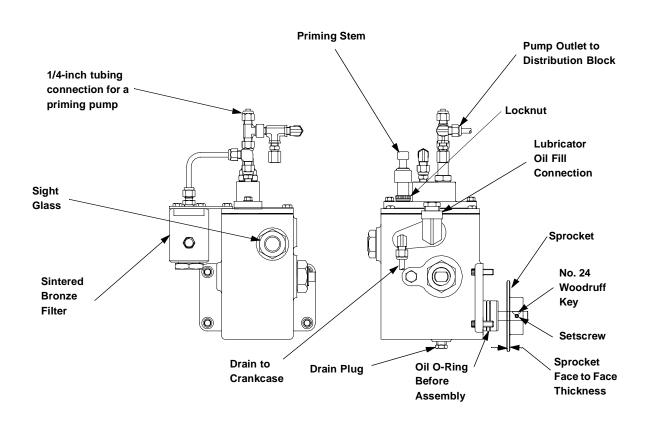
FORCE FEED LUBRICATOR PUMP W/ CHAIN SPROCKET - TYPICAL
